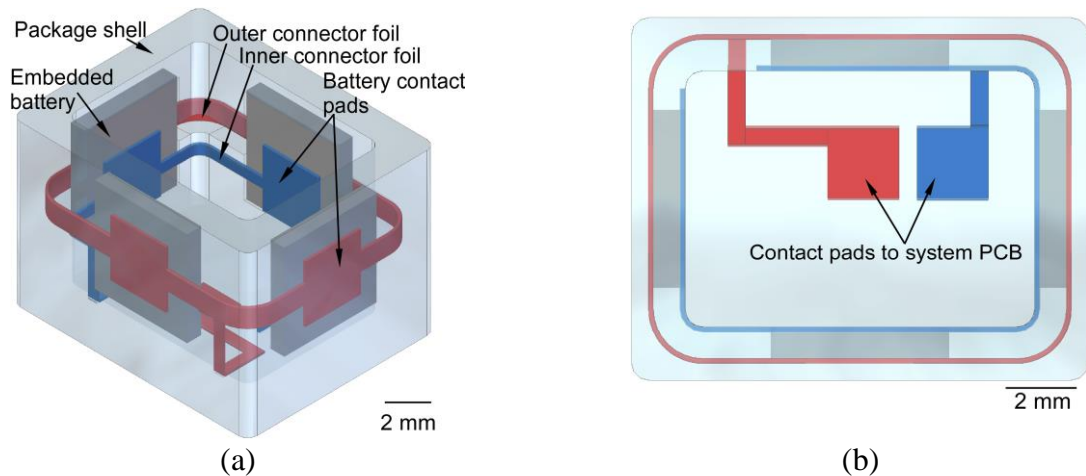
(a) Overall package design including batteries, connector foils, and 3D printed shell. (b) Top-down view of the overall package.
